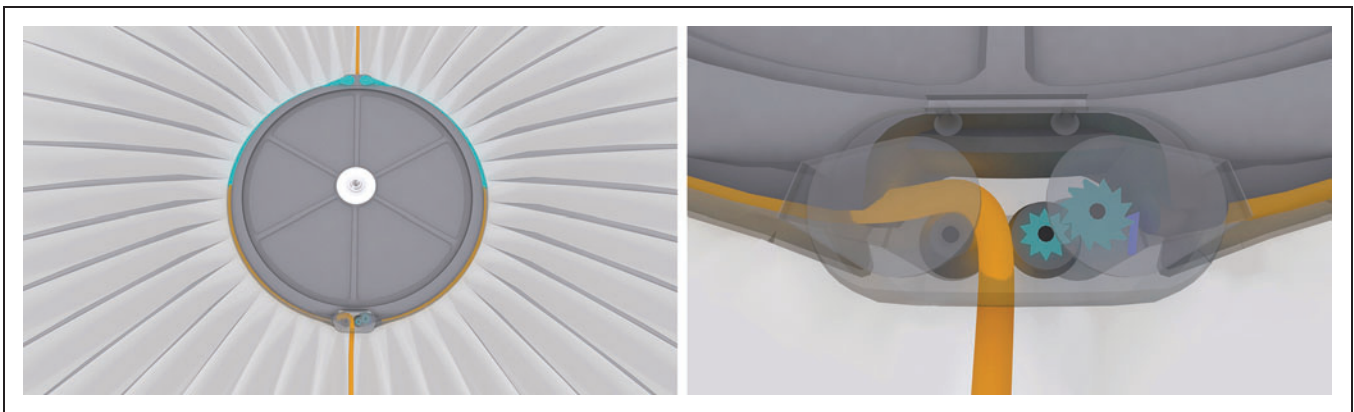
Notional design for closing and sealing mechanism, outside view and detail.
